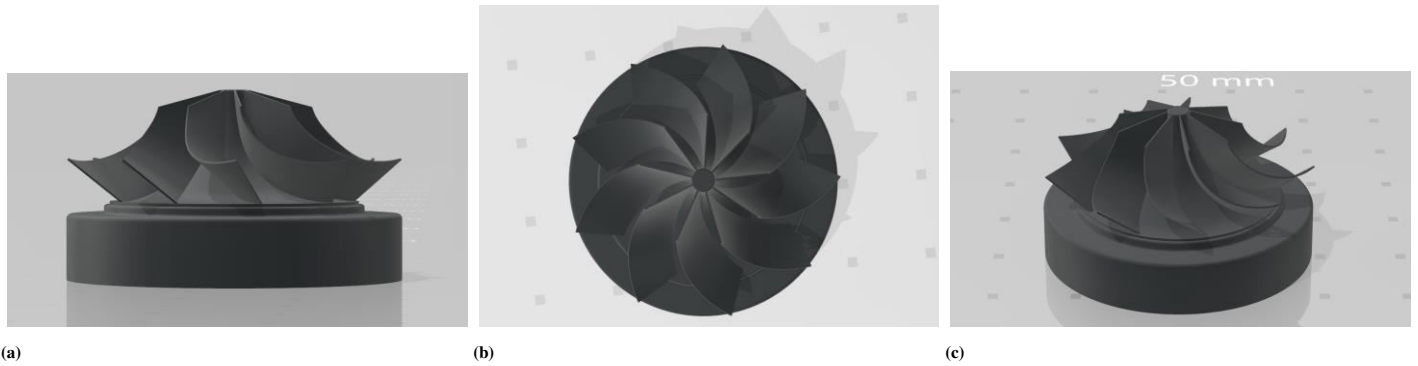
Different views of 3D CAD model created for the design analysis of the Impeller. (a) Side View, (b) Top View and (c) Isometric View
